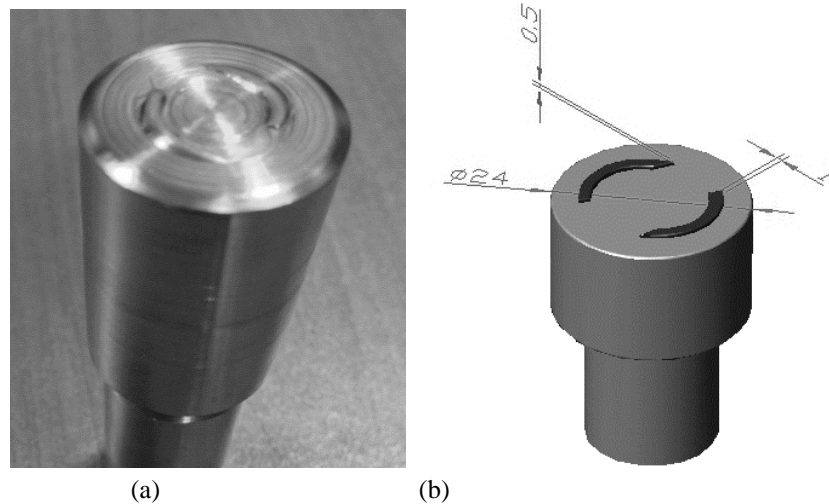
(a) Scrolled shoulder, (b) Sketch of the scrolled tool
